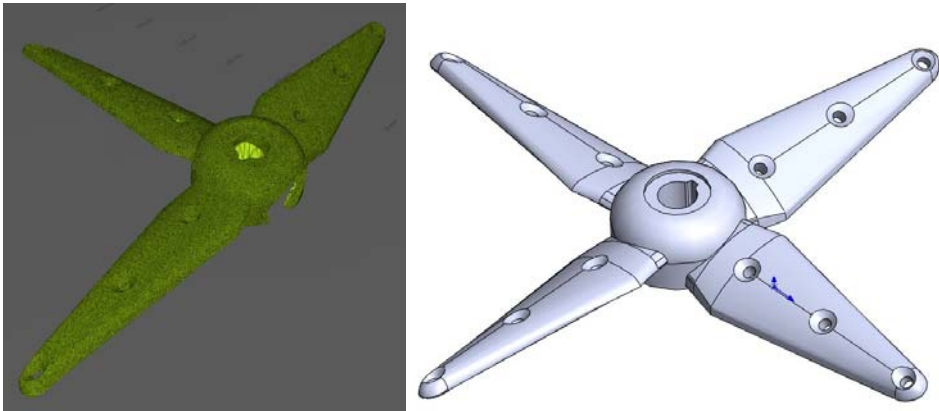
3D scanned old ventilator blades (left), CAD model (right)
